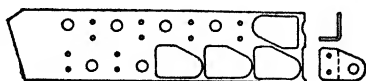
As the direction of rolling is the direction of greatest ductility, it favors severe bending and should be considered in blank layouts.
